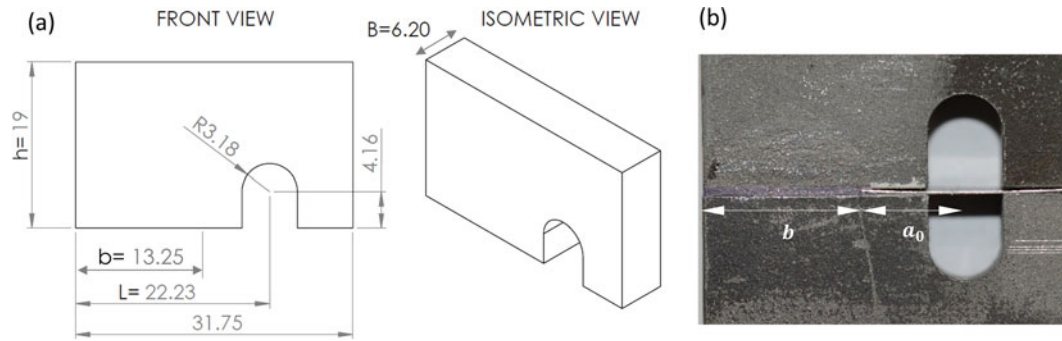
(a) RDCB – specimen geometry (all dimensions are in mm); (b) RDCB specimen showing the bond length b and crack tip a_0
